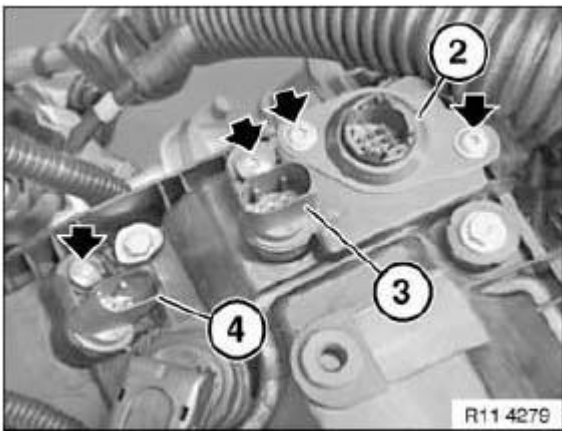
Identifying Sealing Element, Sensors And Sealing Rings
